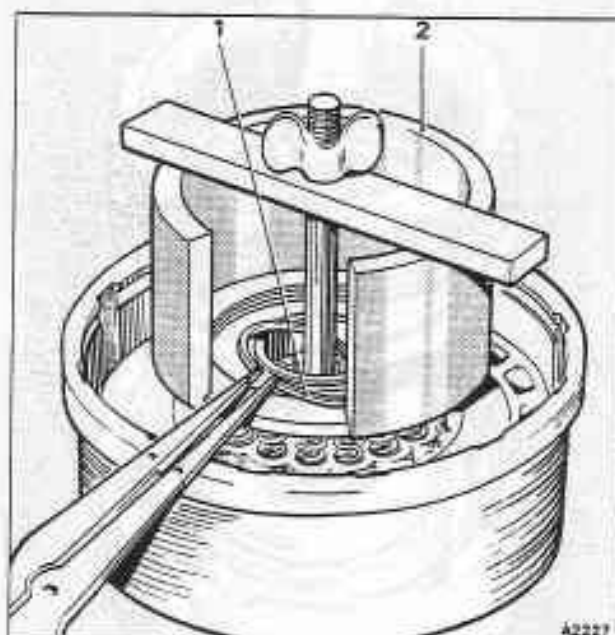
Removing and fitting the direct clutch housing snap ring
